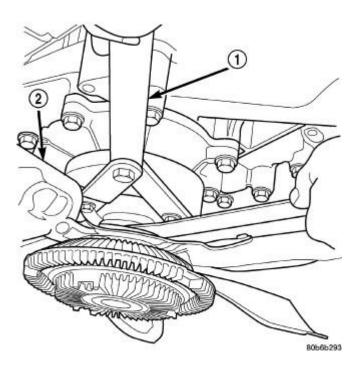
Using Special Tool 6958 Spanner Wrench & Adapter Pins 8346 Courtesy of CHRYSLER LLC
